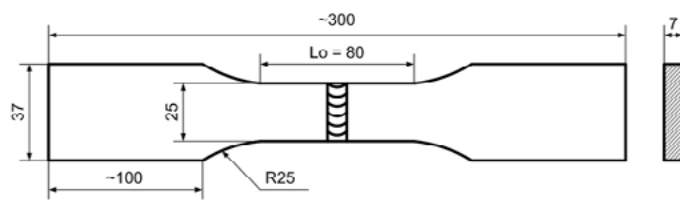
Shape and dimensions of the specimens used in the static tensile tests
